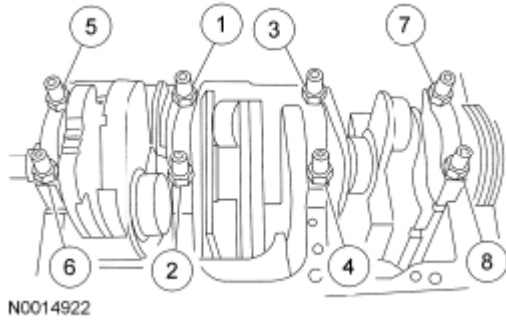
Identifying Main Bearing Cap Bolts In Tightening Sequence
